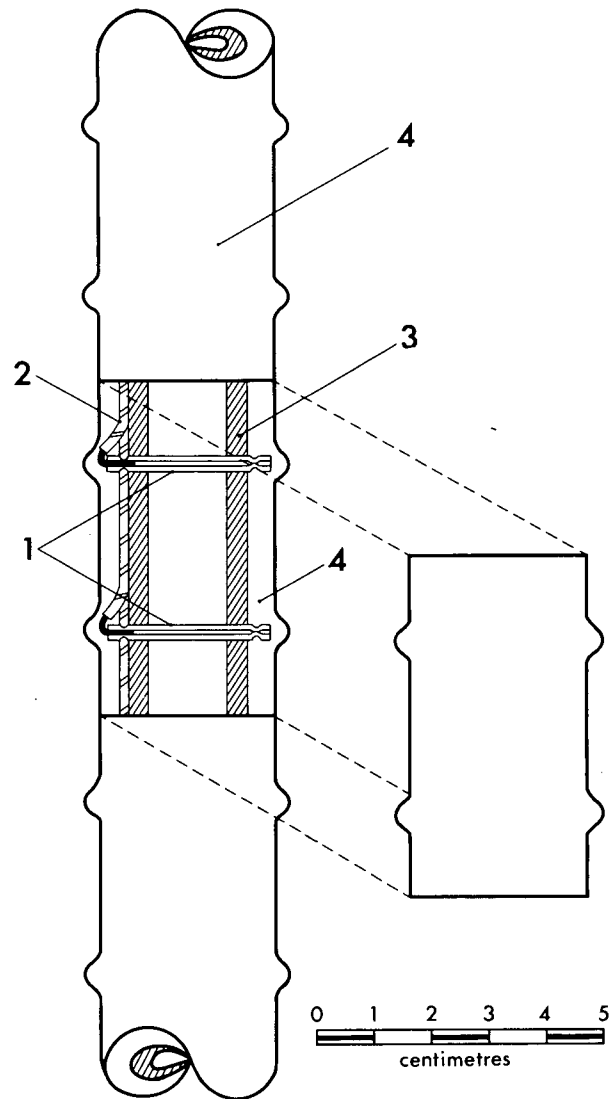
C. Construction details of type III frost gauge. 3.2-mm (1/8 in.) stainless steel tubes (1) with connecting wires (2) crimped into one end were inserted into holes drilled at 3-cm intervals in a length of 21.3-mm (1/2-in. pipe size) PVC pipe (3); the other ends of the small tubes were then crimped to retain the tubes in place. The gauge was waterproofed with two wraps of self-vulcanizing rubber tape, followed by two wraps of plastic tape (4). The bottom end was closed with a 21.3-mm (1/2-in. pipe size) PVC cap (not shown), the pipe was filled with 3-mm styrofoam balls and water, and the top plugged with a small cork (not shown).
